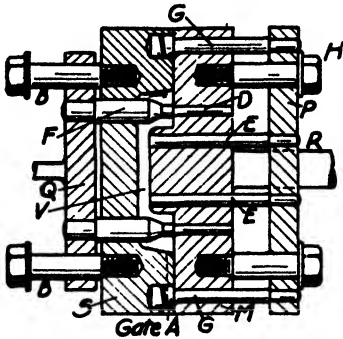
Die-casting Mold Operation—Stage 1.
